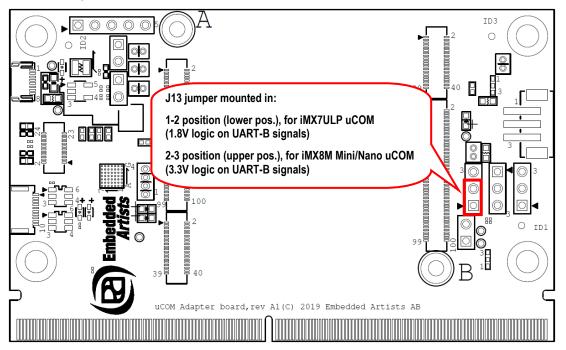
uCOM Adapter Board rev A1, J13 Location, Top Side
